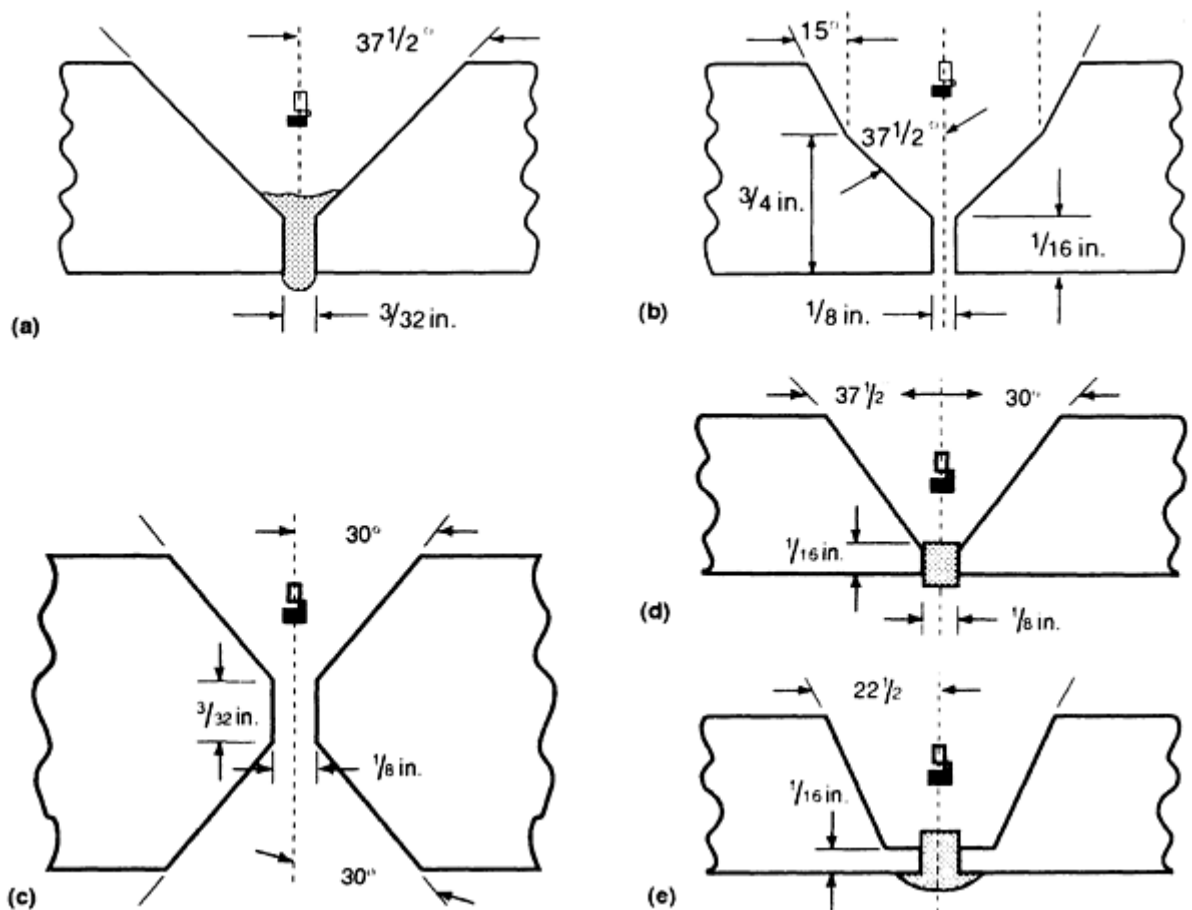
SELECTED JOINT CONFIGURATIONS AND WELDING INSERTS USED IN GTAW PROCESSES. (A) Y-TYPE INSERT, $\frac{5}{32}$ IN., FOR INDEXING WHEN ACCESSIBILITY IS LIMITED; NO LAND REQUIRED. (B) COMPOUND BEVEL WITH OPEN ROOT, $\frac{1}{8}$ IN. GAP; LAND, $\frac{1}{16}$ IN. THICK. WASHER-TYPE INSERT ($\frac{1}{8} \times \frac{5}{32}$ IN.) SHOULD BE USED IF INSERT REQUIRED. (C) INSIDE DIAMETER/OUTSIDE DIAMETER PREPARATION WITH OPEN ROOT, $\frac{1}{8}$ IN. GAP; LAND, $\frac{3}{32}$ IN. THICK. WASHER-TYPE INSERT ($\frac{1}{8} \times \frac{5}{32}$ IN.) SHOULD BE USED IF INSERT REQUIRED. (D) WASHER-TYPE INSERT ($\frac{1}{8} \times \frac{5}{32}$ IN.); LAND, $\frac{1}{16}$ IN. THICK. (E) J PREP MUSHROOM INSERT; LAND $\frac{1}{16}$ IN. THICK; EXTENDED LAND, $\frac{3}{32}$ IN. LONG
